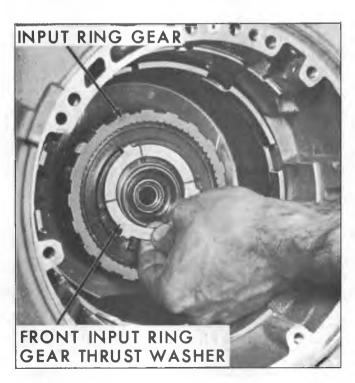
M--Removing Input Ring Gear Front Thrust Washer
